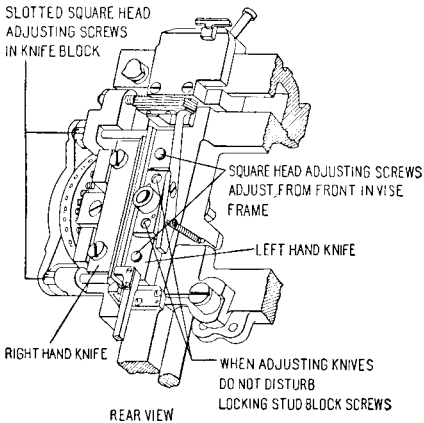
Diagram of the knife block and knives and screws when the vise is lowered. The adjustments for the knives are shown. When the right-hand knife is adjusted it should not be disturbed, and if necessary the left-hand knife should be adjusted to it.
